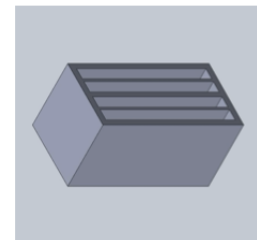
Final Design Crate. Dimensions: 12 cm x 24 cm x 12 cm
